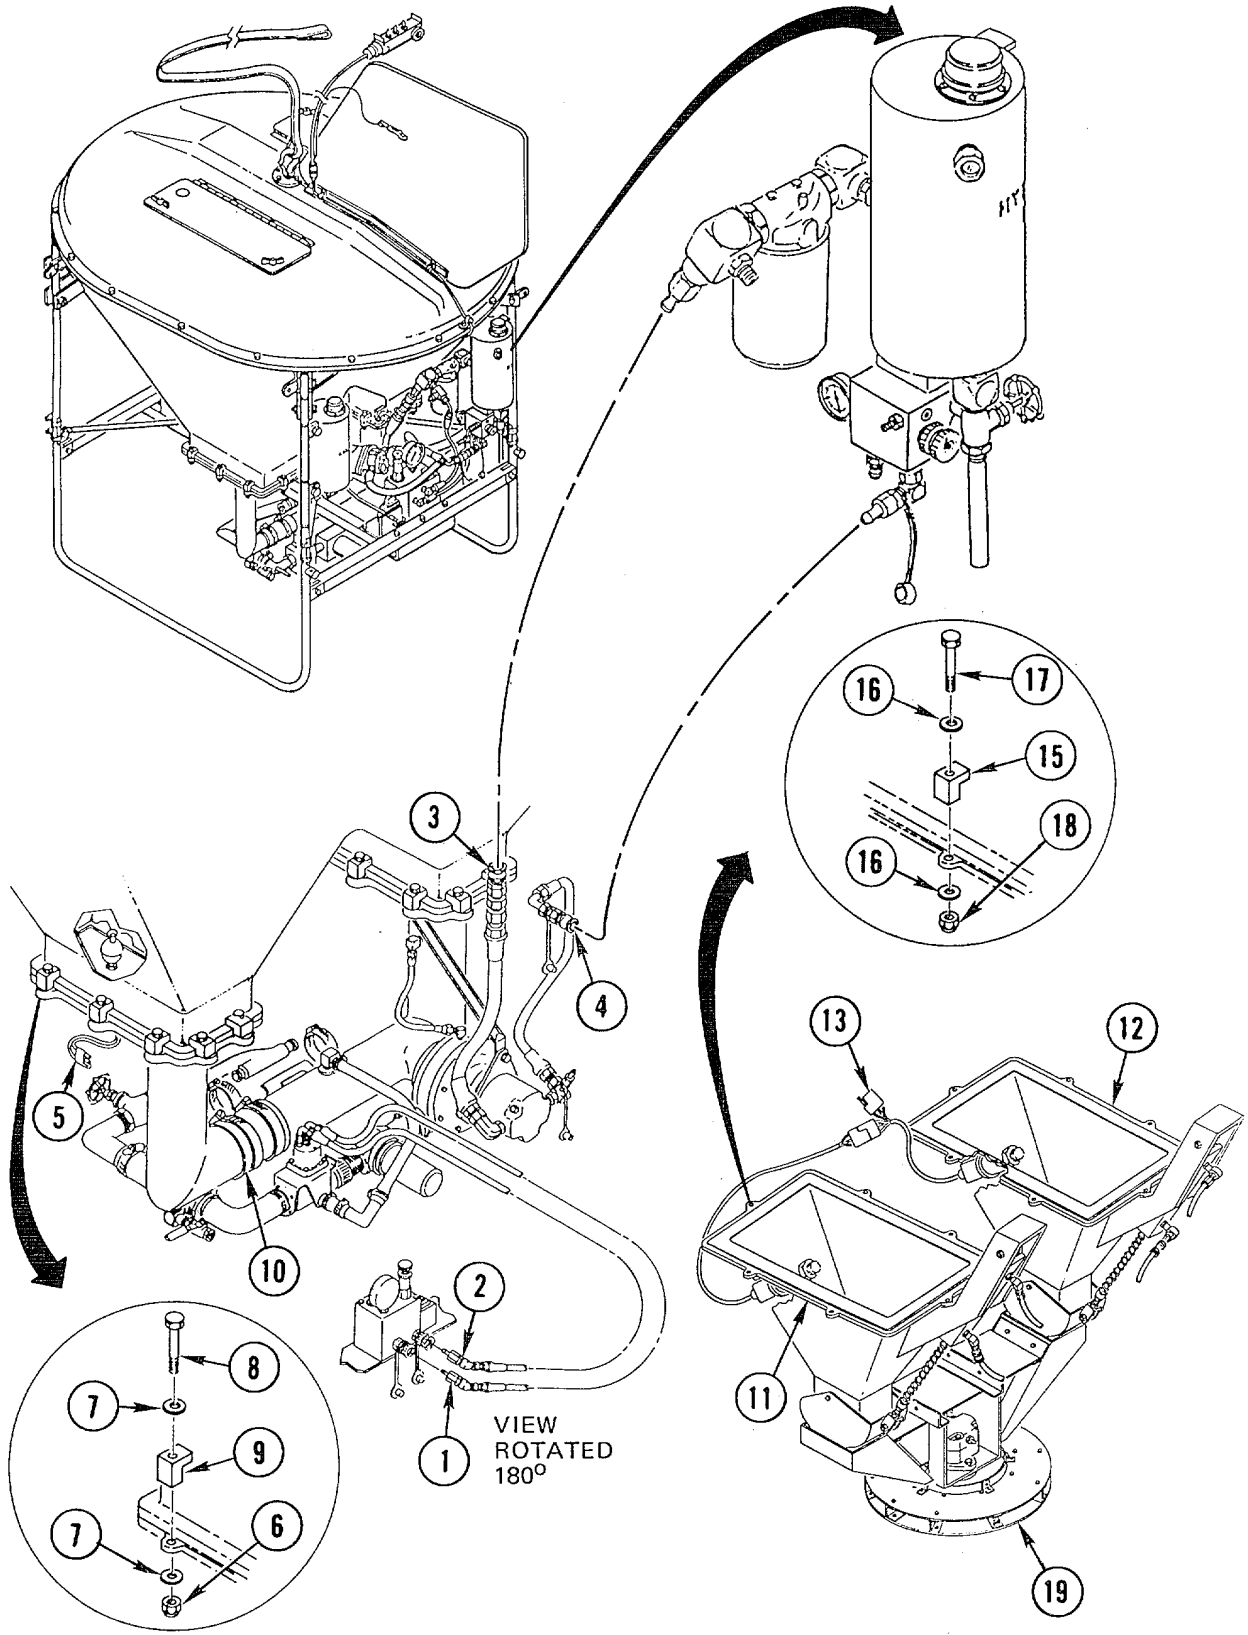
Assembly of SD System (Sheet 1 of 2)
